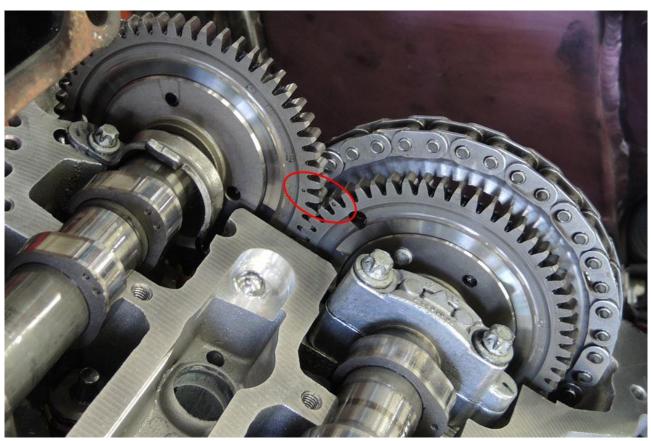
The photo shows that the camshaft gear wheels were correctly positioned in relation to each other. The red circle marks the alignment marks on the wheels. Photo: NSIA
